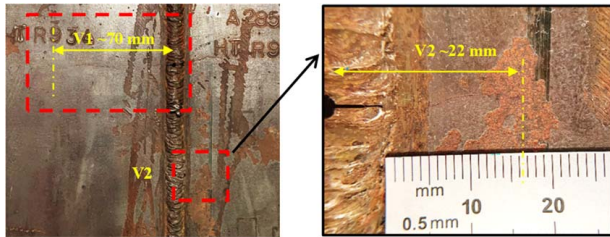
Visual inspection of stress corrosion cracking V1 and V2 (image of V2 was obtained with the aid of a hand hold magnifier)
